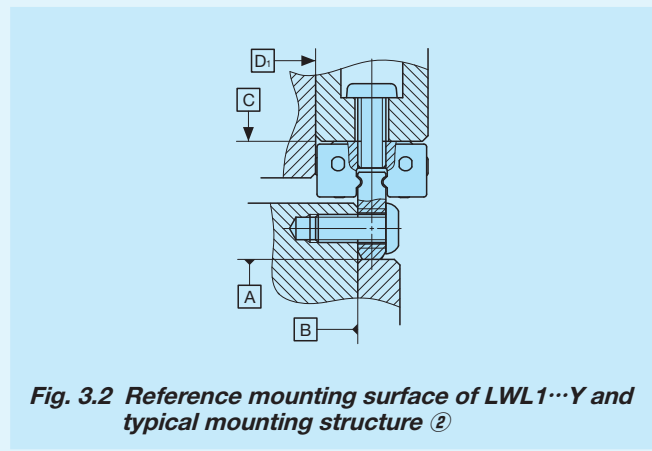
Reference mounting surface of LWL1...Y and typical mounting structure ②
